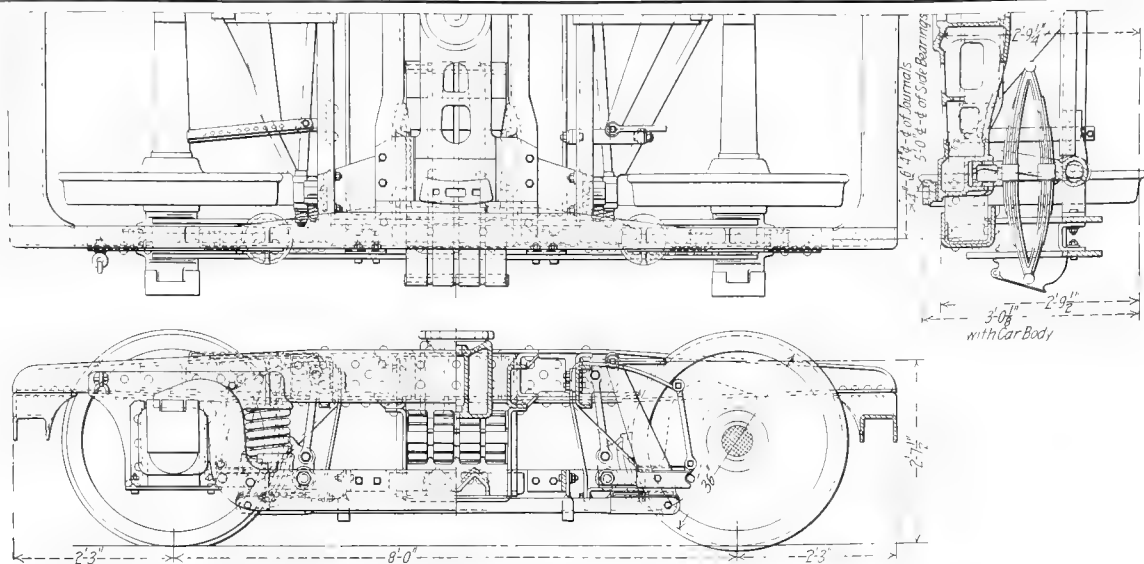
Four-Wheel Truck for Electric Motor Car. Standard Motor Truck Company.
